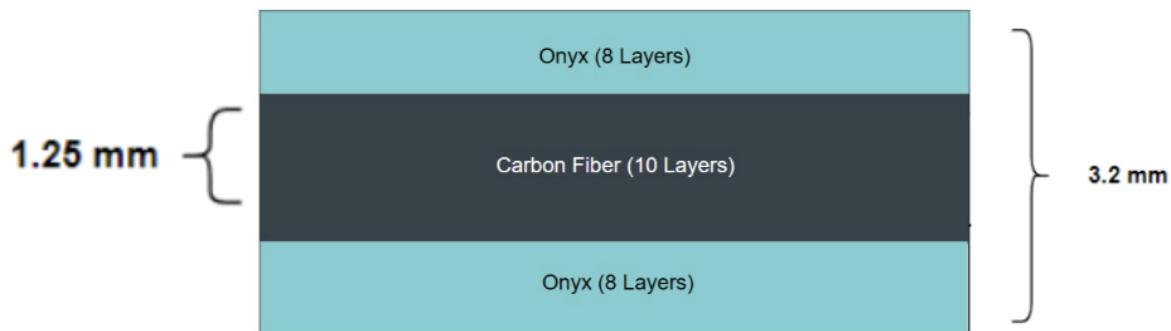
Layer arrangement in the 3D-printed tensile test specimen
